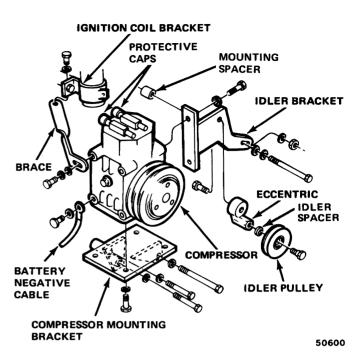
Compressor Mounting—1975 Eight-Cylinder Engine
